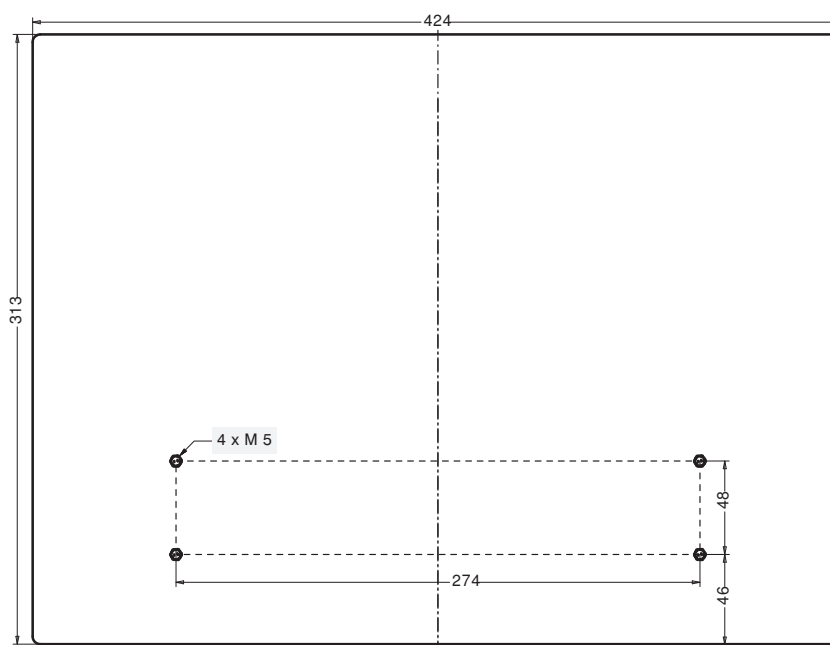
Back, S15 stainless steel enclosure (all dimensions in mm)
